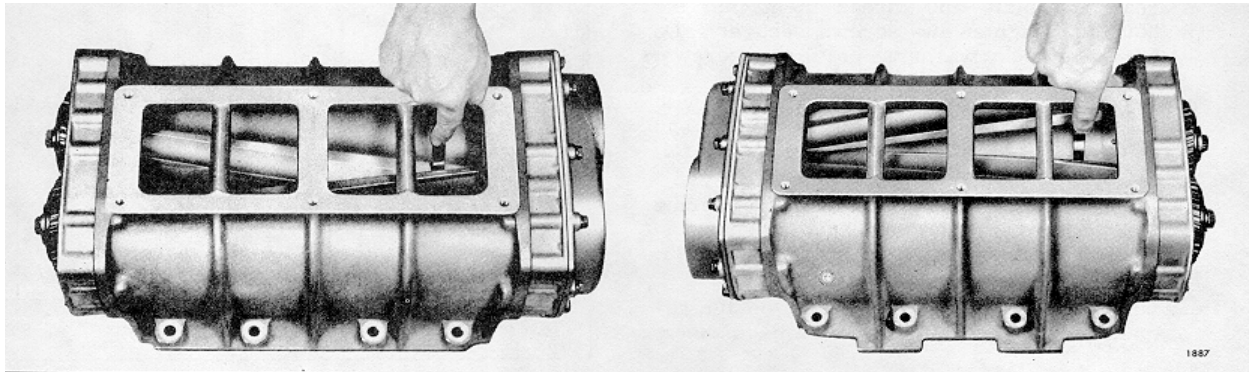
Measuring "CC" and "C" Clearances Between Blower Rotor Lobes
